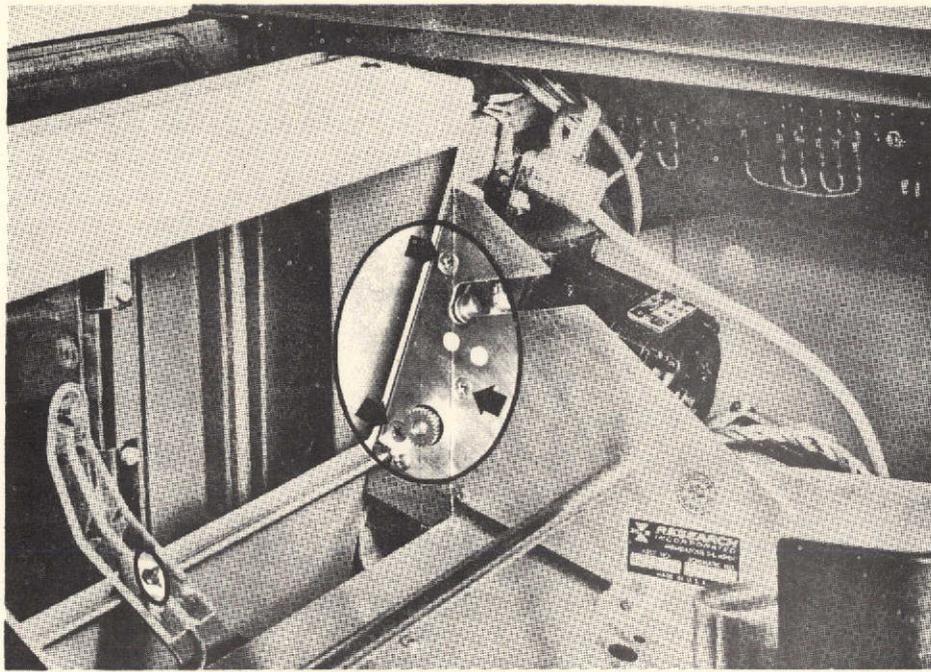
VIEW OF PROGRAM CARRIAGE WITH PROGRAM DRUM REMOVED
